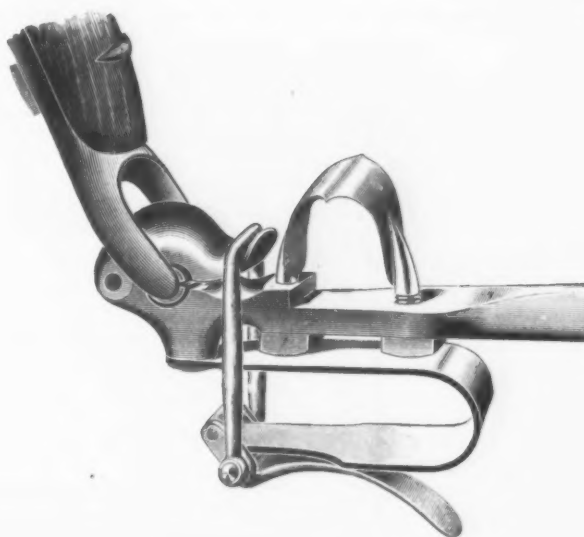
Eccles' Ball Bearing Coupling No. 25.
